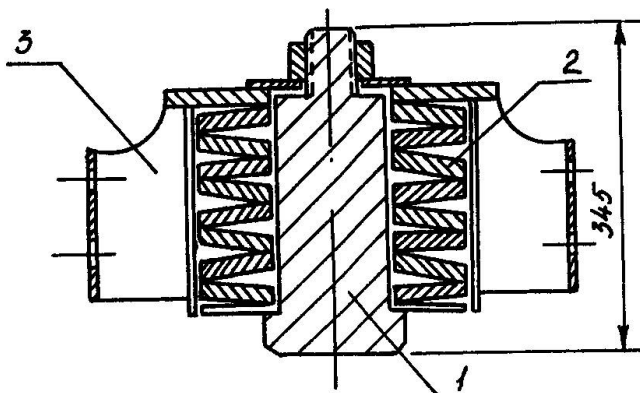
Buffer device: 1-bulky body; 2-disc spring; 3-housing
